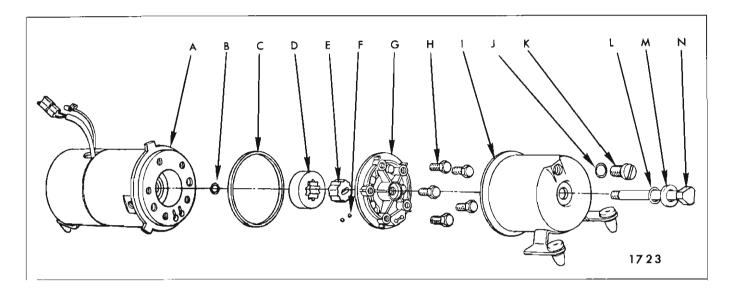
Hydro-Lectric Motor and Pump Disassembled
